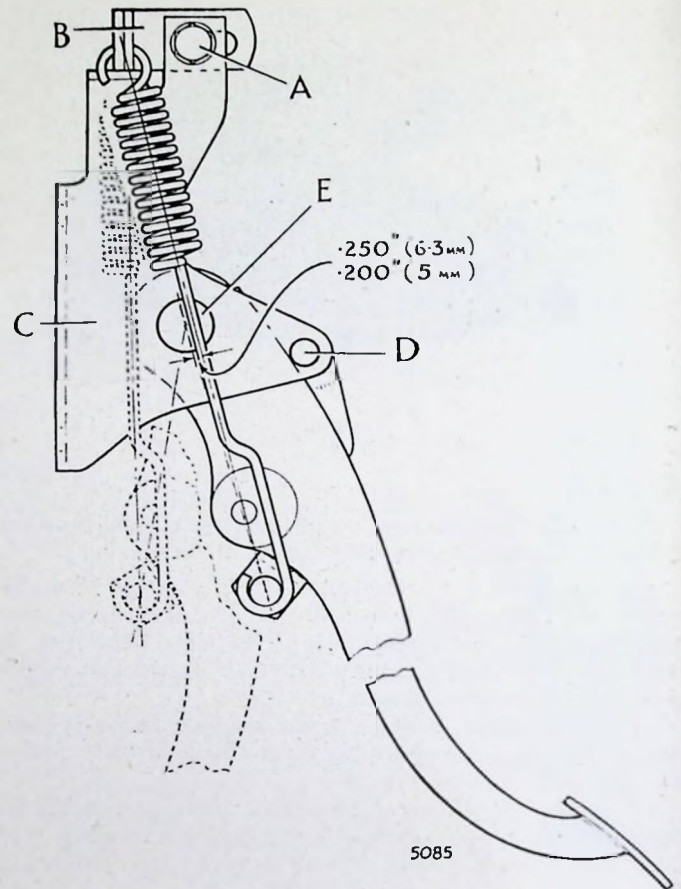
Clutch helper assembly, showing required adjustment. (Series IIIA.)
